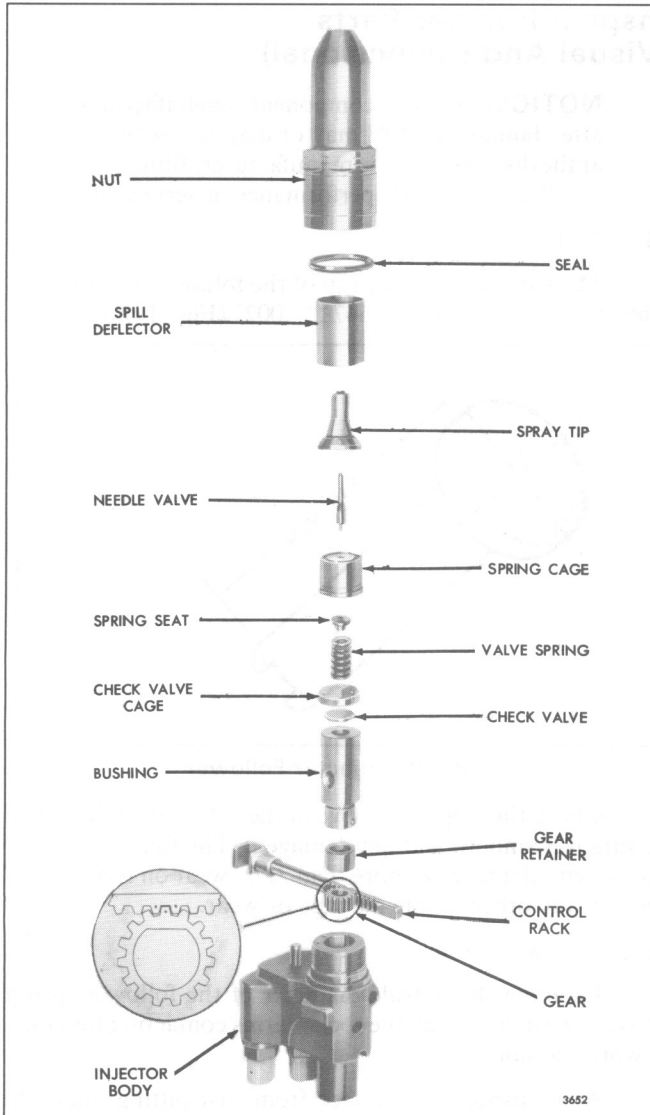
Injector Rack, Gear, Spray Tip and Valve Assembly Details and Relative Location of Parts
